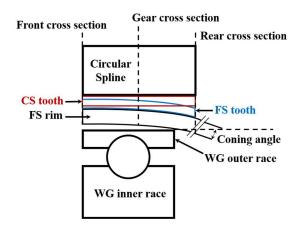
Uneven engagement between flexspline and circular spline caused by the coning angle.
